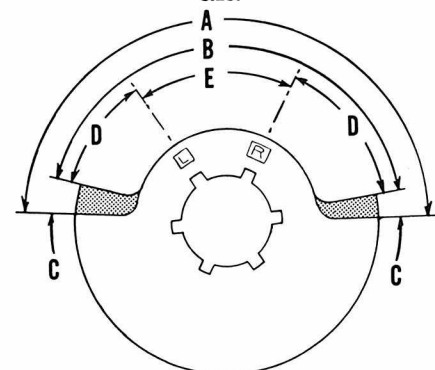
Drawing of rotary valve showing suggested modifications.
